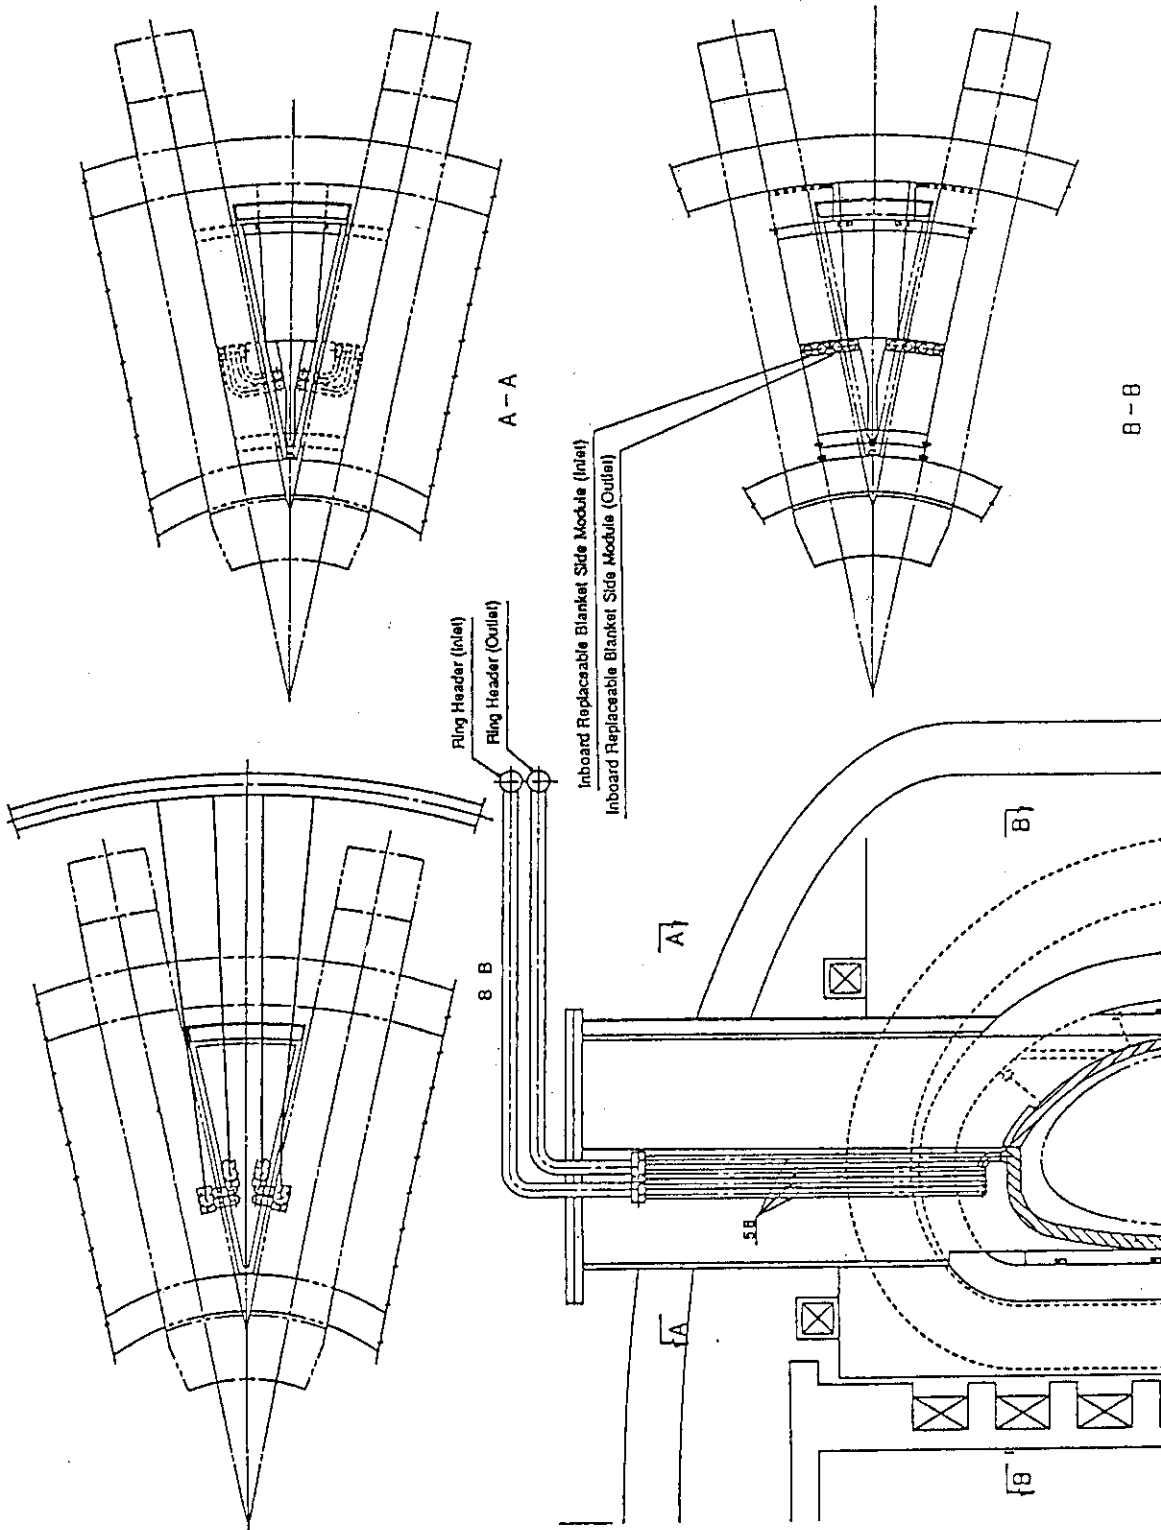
Coolant pipe arrangement for inboard replaceable side module.
